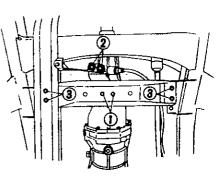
Removing four bolts securing propeller shaft to companion flange
